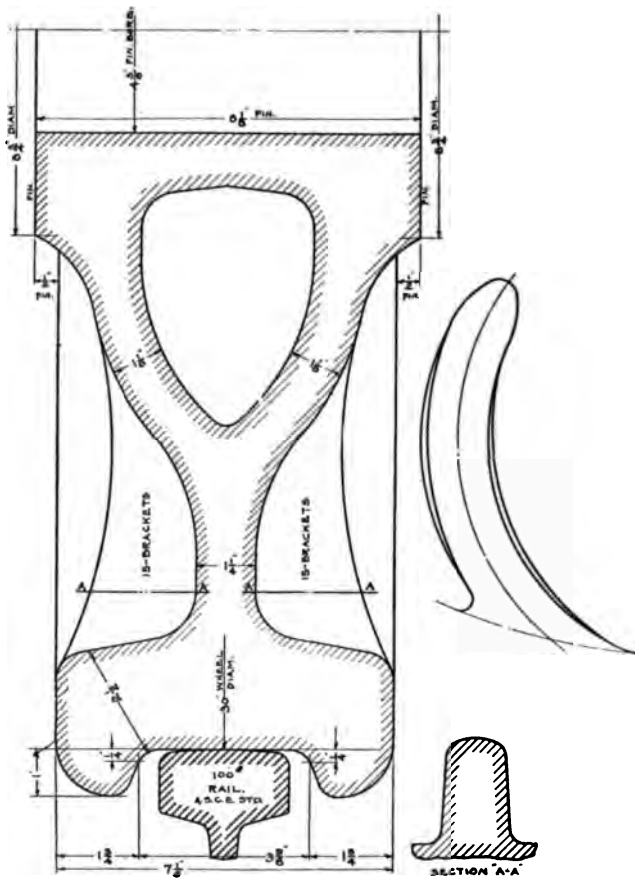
30-IN. 875-LB. DOUBLE FLANGE CHILLED IRON CRANE WHEEL, DOUBLE PLATE TYPE. FOR MAXIMUM VERTICAL LOAD 43,000 LB. MAXIMUM SAFE FLANGE PRESSURE 32,000 LB.
